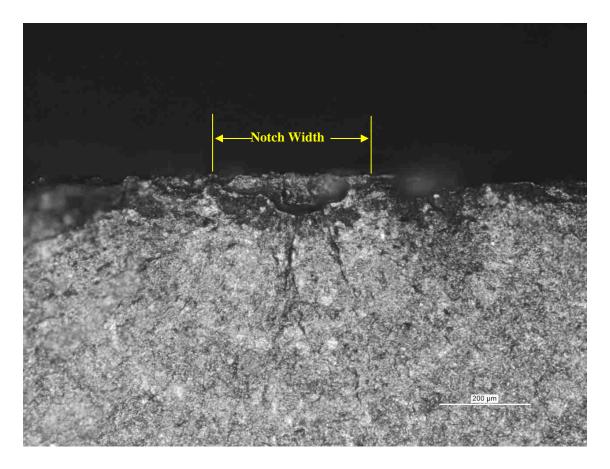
Multiple Notch Width, Fracture Surface
